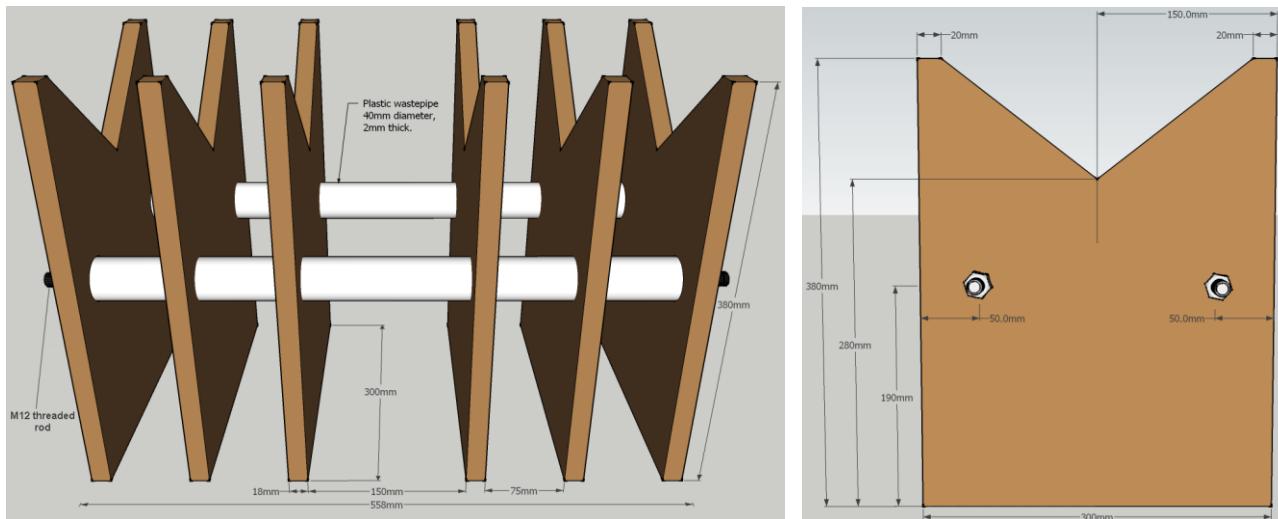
CAD drawing of a chainsaw horse constructed from 18mm thick MDF, 12 mm threaded rods, nuts, washers and plastic waste-pipe.
